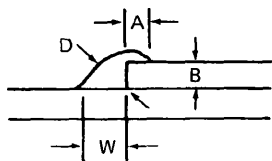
Typical Fillet Dimensions (Sheet 1 of 2)
